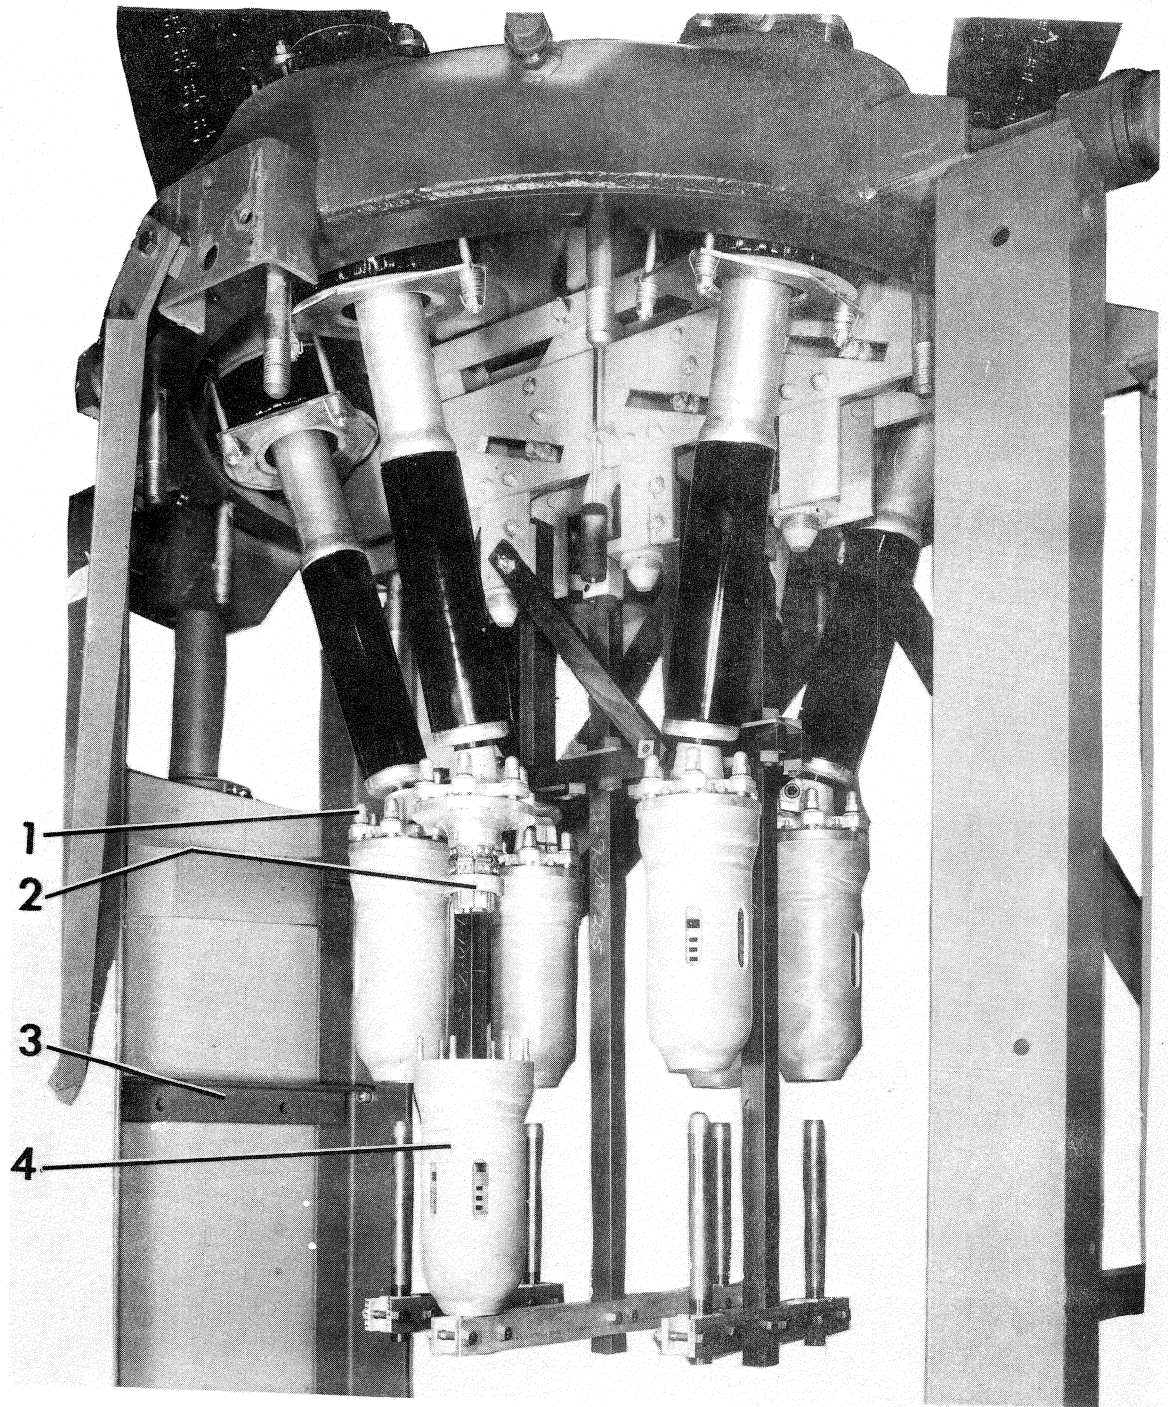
Closing Buffer for 15.5 through 48.3 kV Breakers
